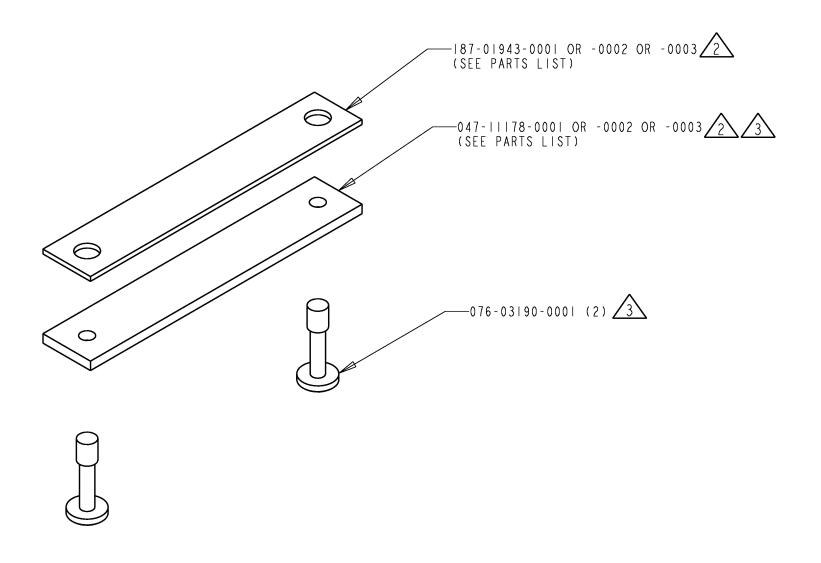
KXP 2290 INSTALLATION DRAWING (Dwg. 155-01786-0000 Rev. B, Sheet 4 of 4)
